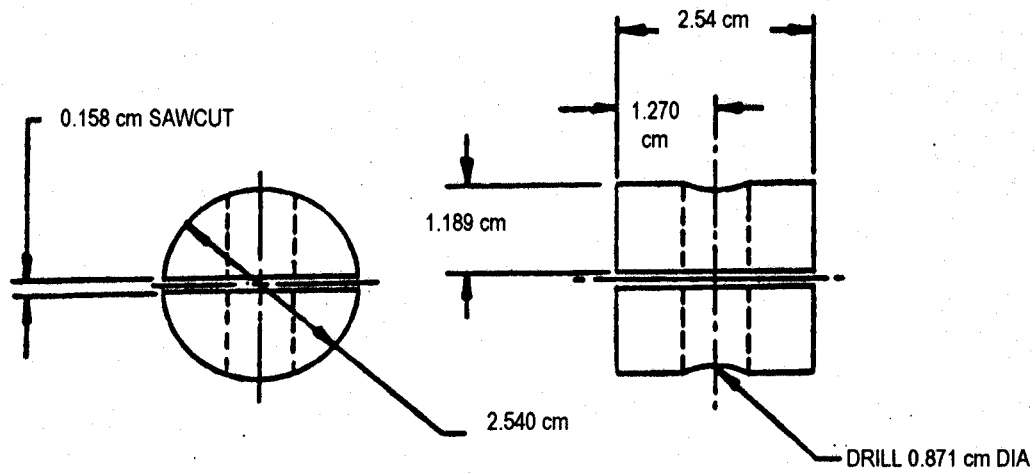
Rocker for Bent Beam Stress Corrosion Assembly
